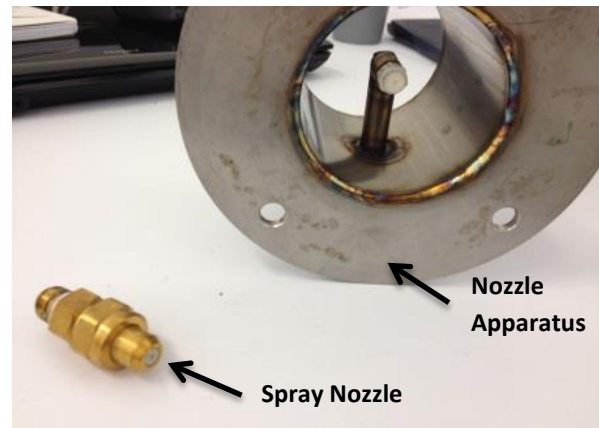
Hydraulic nozzle and removable nozzle apparatus
